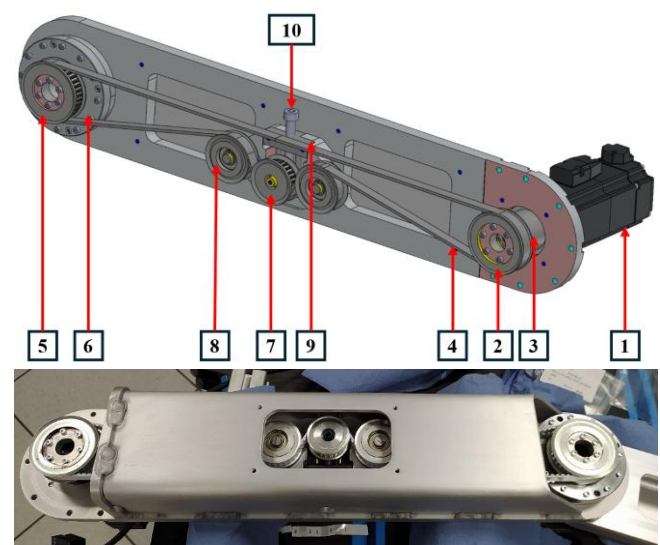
CAD model and assembled arm with belt to drive second part arm where: 1 – servomotor; 2 – timing pulley; 3 – adapter; 4 – toothed belt; 5 – timing pulley; 6 – strain wave gear; 7 – tensioner gear; 8 – smooth wheels; 9 – tensioner moving plate; 10 – regulation screw
